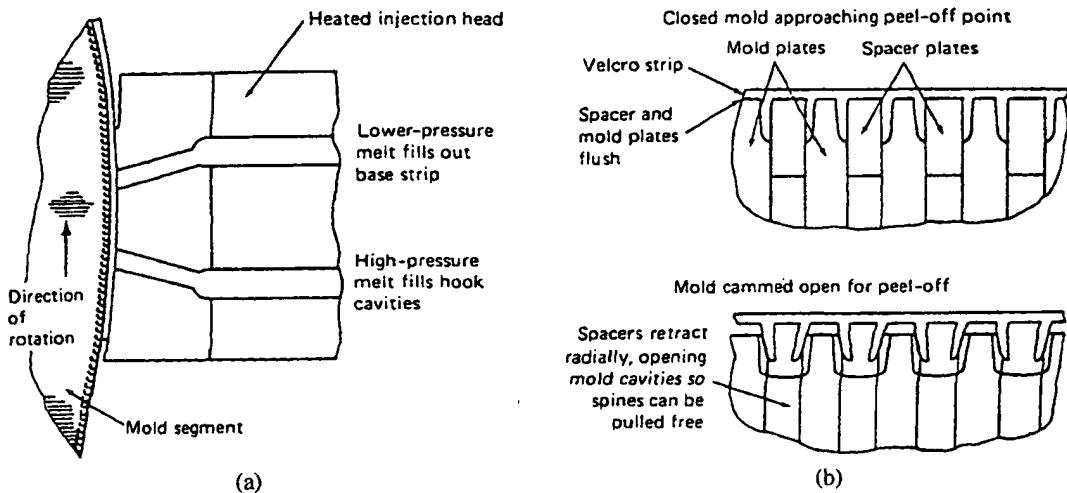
Molding Velcro. (a) Two orifices feed melt onto a rotating mold. (b) Method used to peel Velcro strip from the mold.
